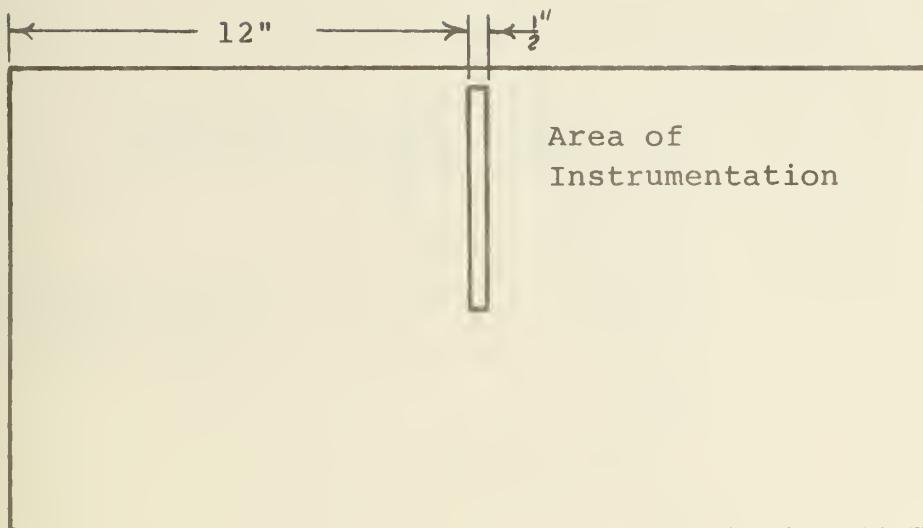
Location of Instrumentation on HY-130 Specimen I and 1020 Steel
